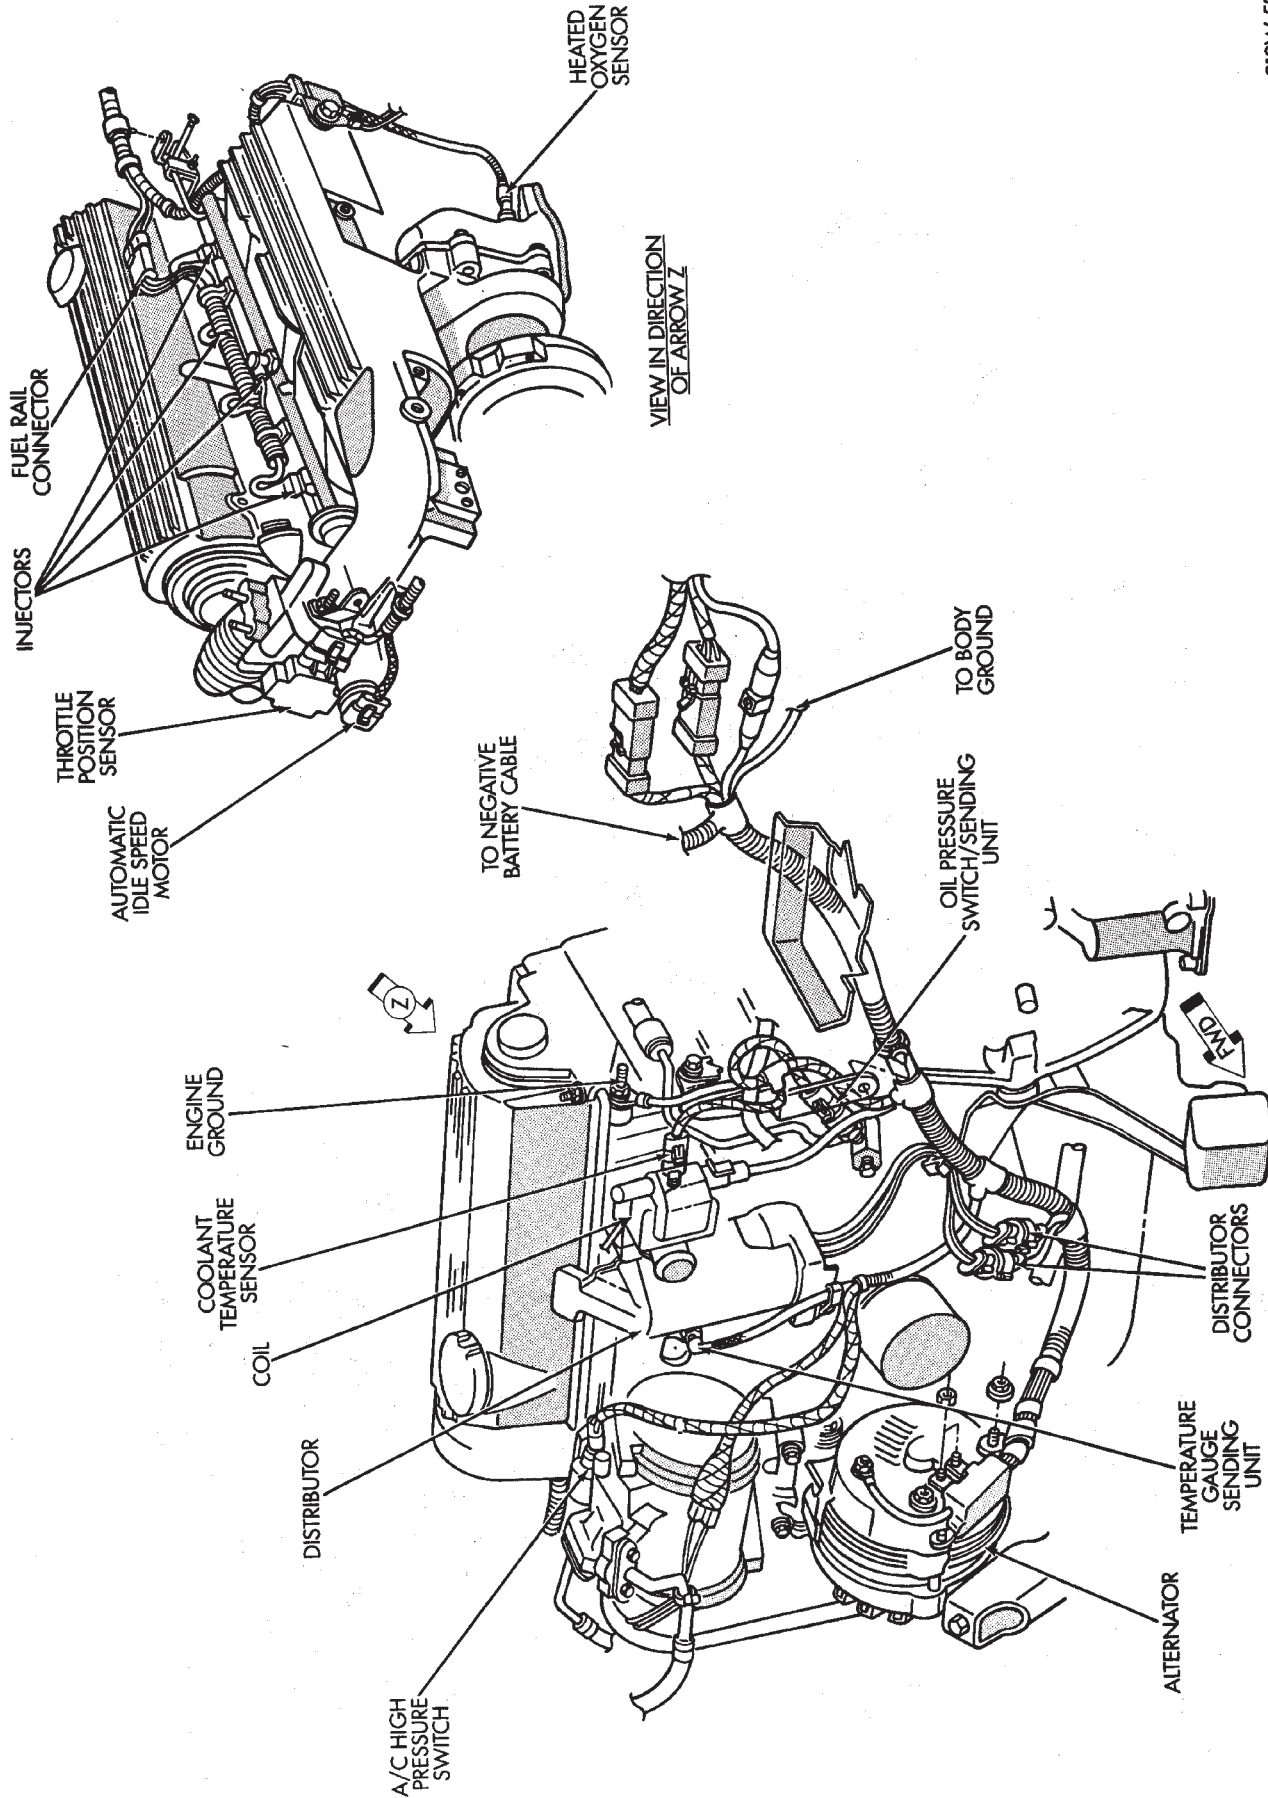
Engine Wiring 2.5L Turbo AG Body
